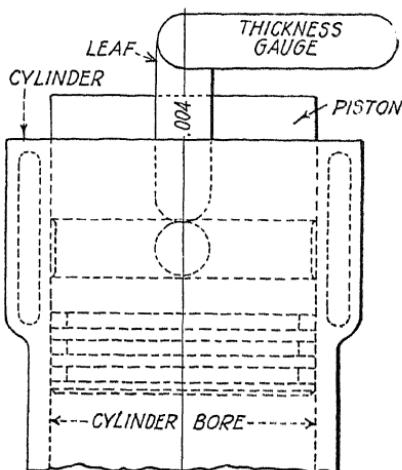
Measuring Piston Clearance with Thickness Gauge
